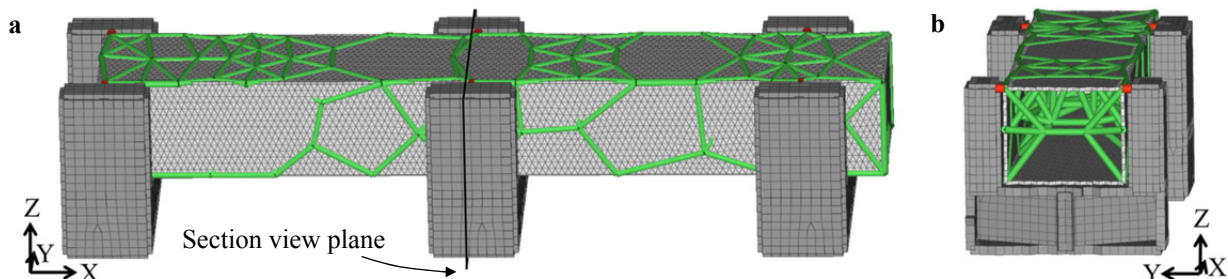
Best bio-inspired lattice girder structure based on connection of neighboring points. (b) shows the section view marked in (a). The shell thickness and beam cross section of the elements are displayed (green: lattice, bright grey: outer surfaces of the girder, dark grey: pedestals, red: beams connecting girder and pedestals).
